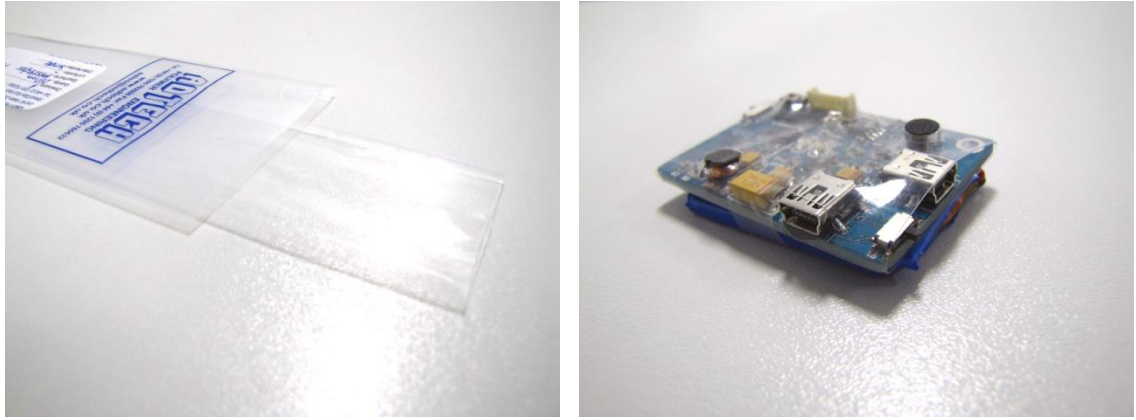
Encapsulation of the PCB and battery by a heat-shrinkable sleeve
